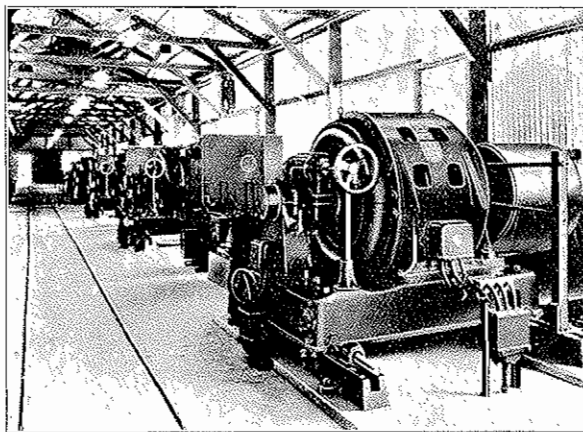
5 of an order on 12 slipringmotors 250 B.H.P. 2000 Volts 500 r.p.m. for tube mill drive.
